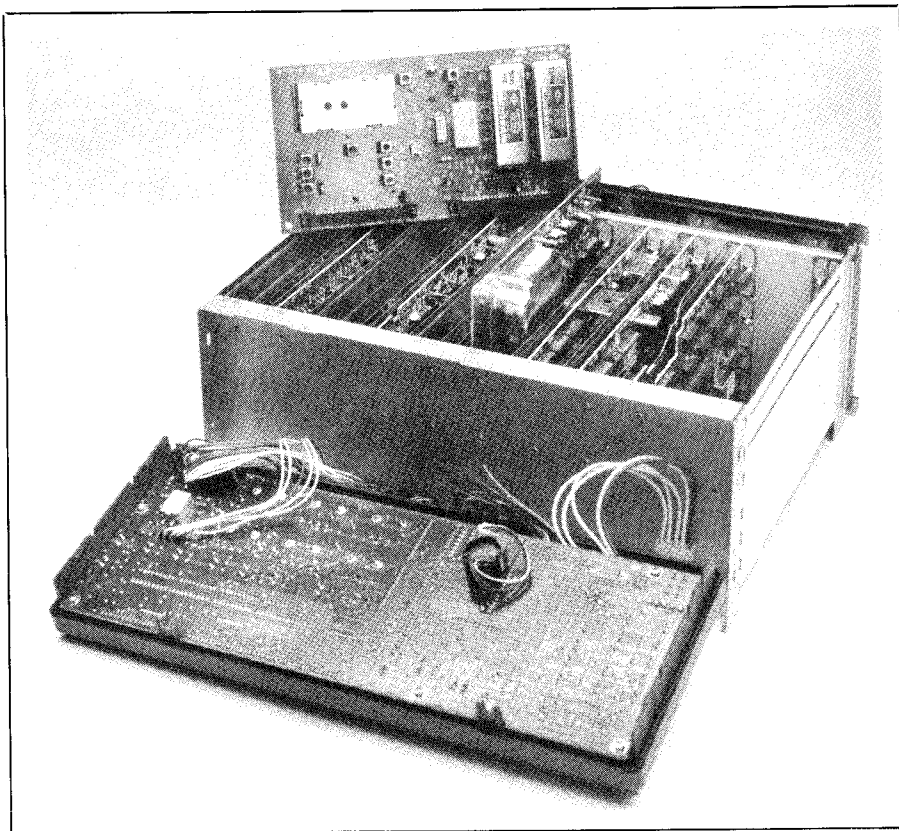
Construction of the NRD-525 receiver. Most of its circuitry is contained on boards mounted in a card cage; here, the IF-filter board has been removed for your inspection. The assembly in the foreground is the '525's plastic front panel—face down.
